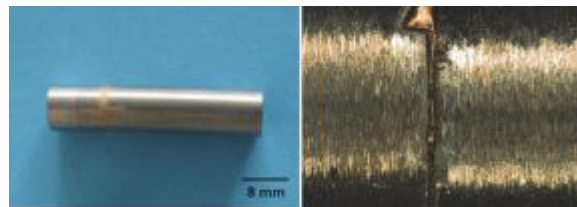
Joint tungsten sample (8 mm diameter) fabricated for shear testing. Left: Detail view of brazing zone.
